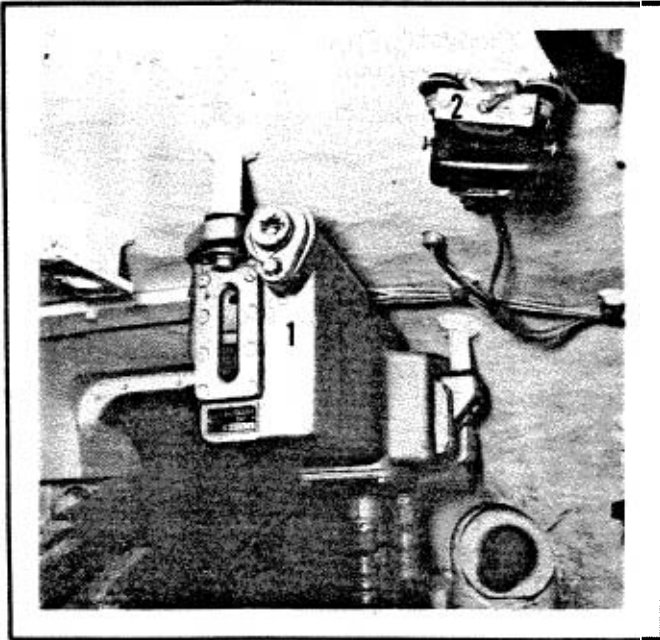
HANDLE DISENGAGEMENT LEVER
